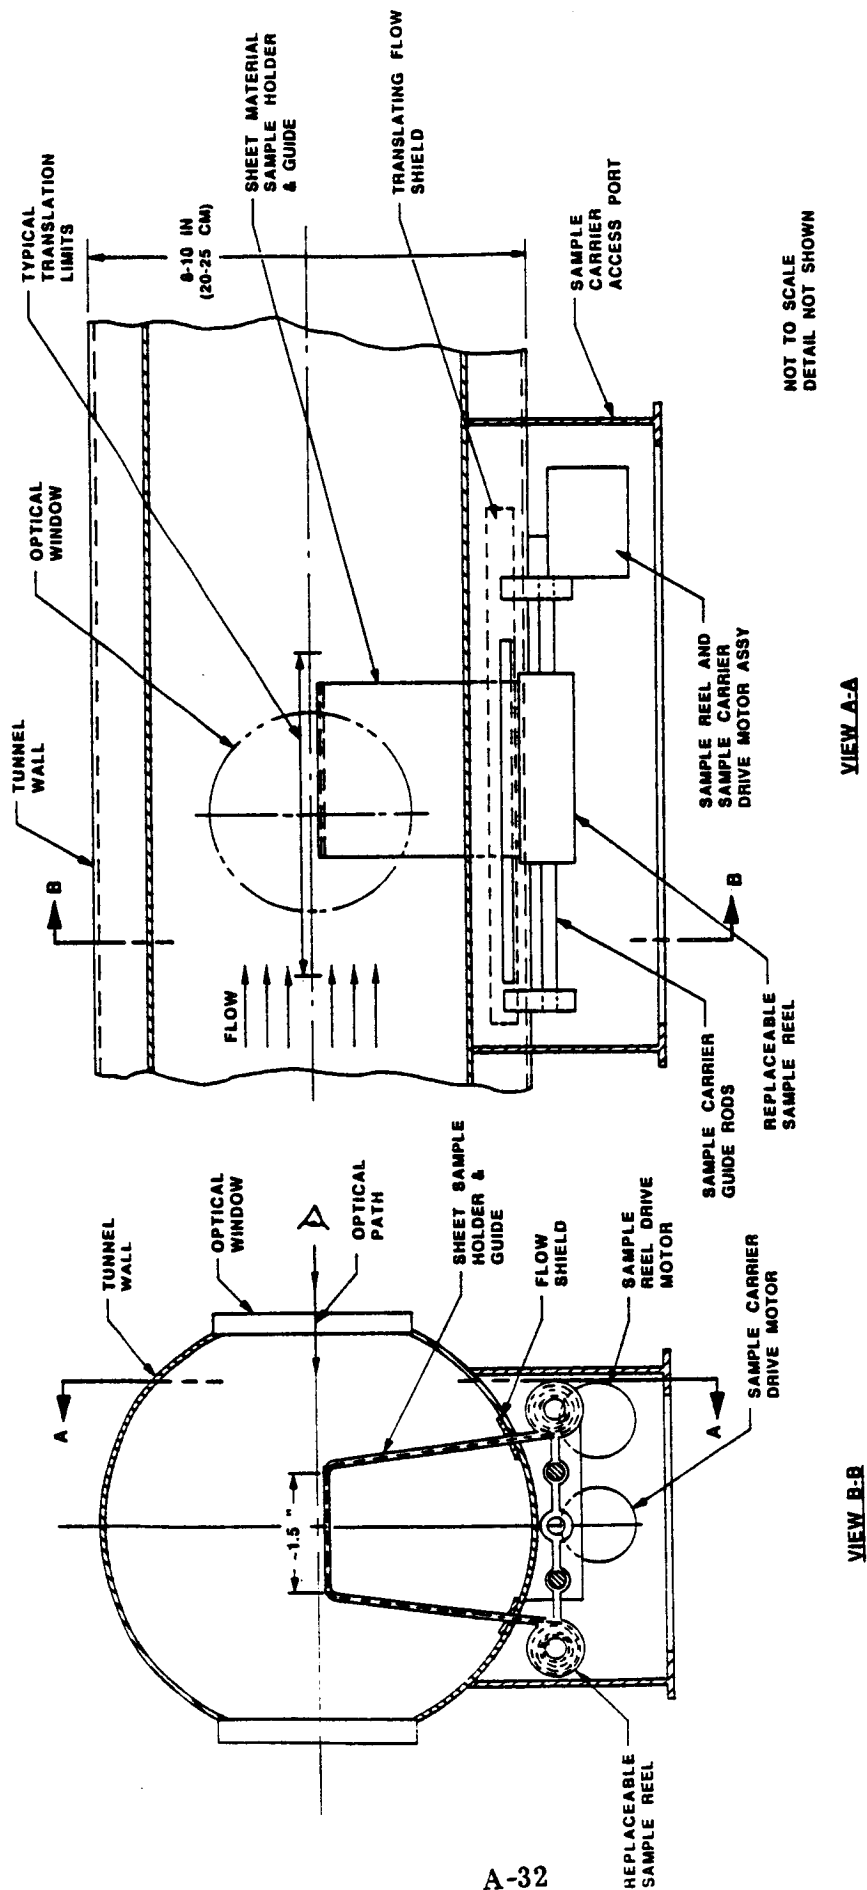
CONCEPT 2 - REEL-TO-REEL SAMPLE HOLDER, CROSS-SECTIONAL VIEW
